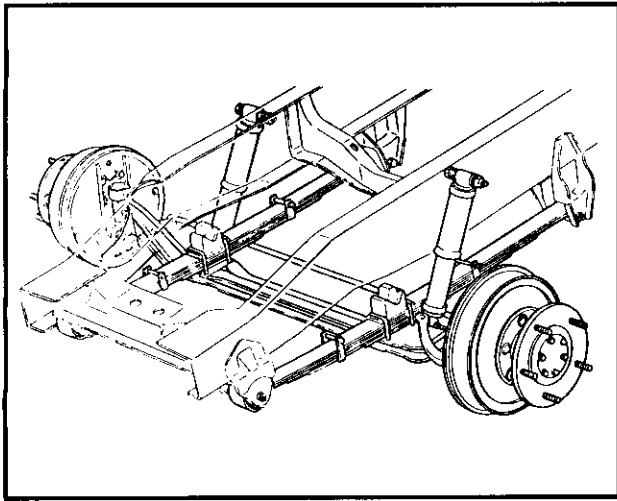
Monobeam Suspension (Courtesy of DANA)
